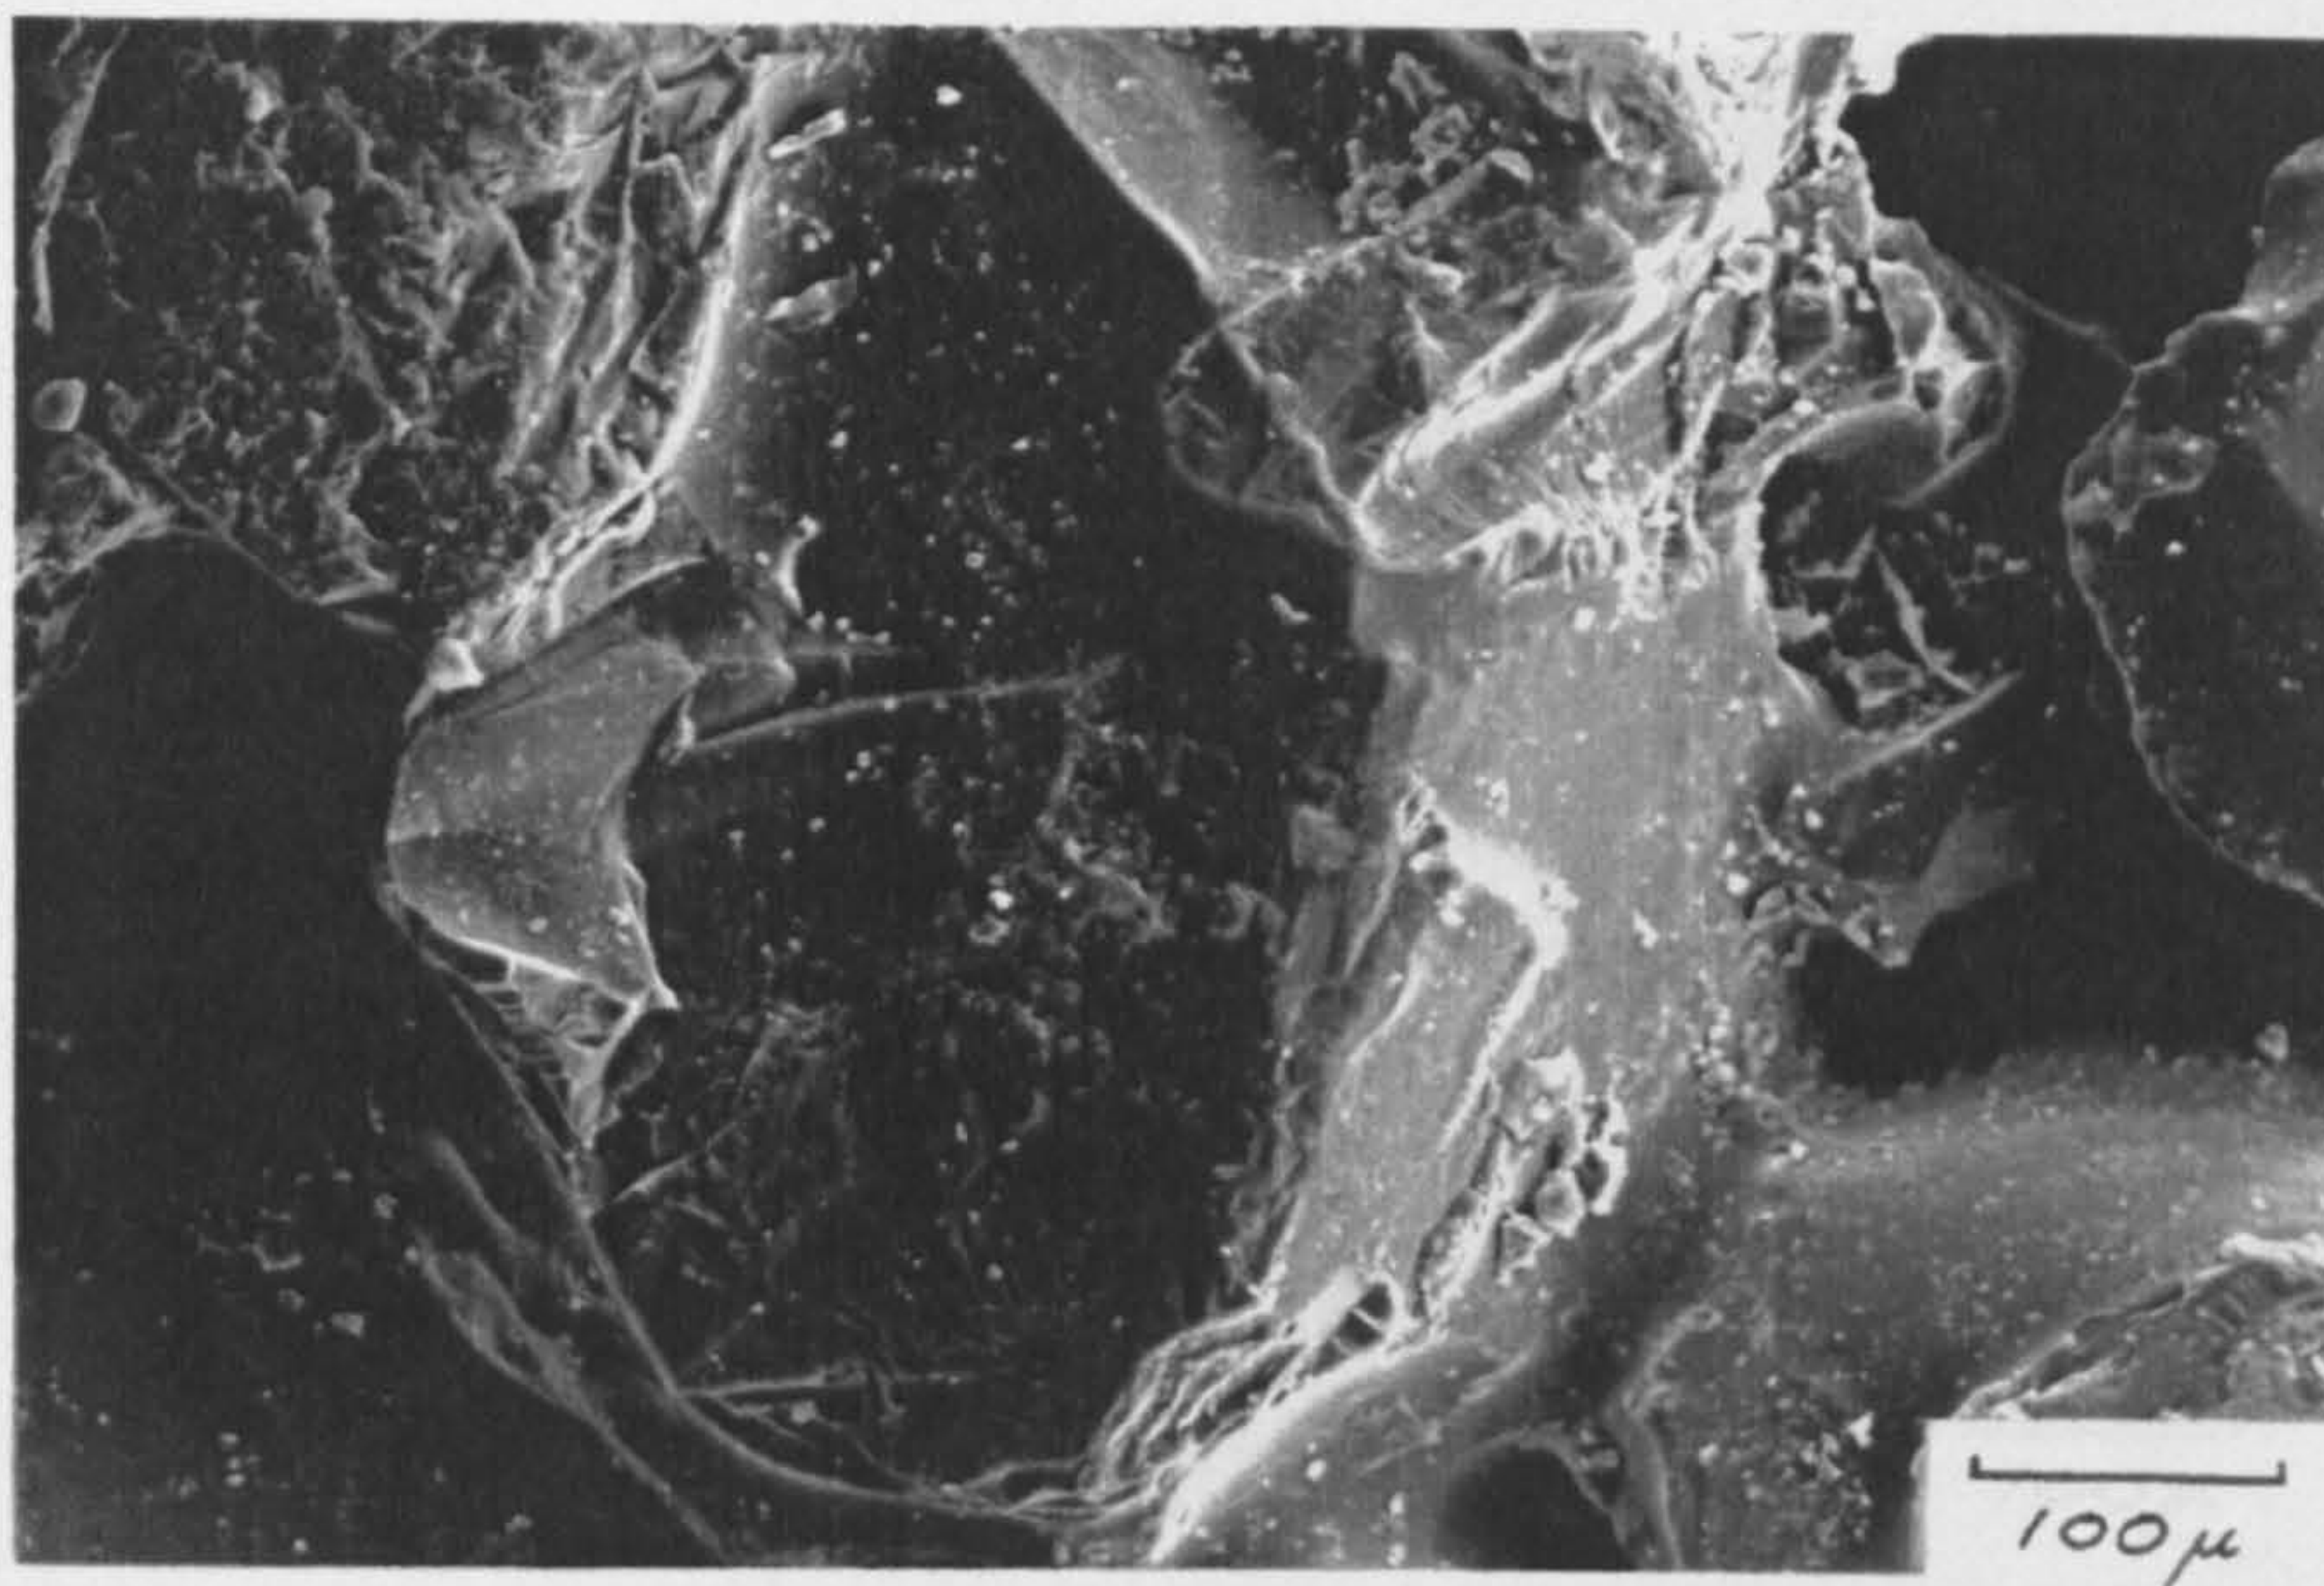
Illustration of attritious wear of a white alumina wheel due to mechanical friction acting between workpiece and abrasive.
